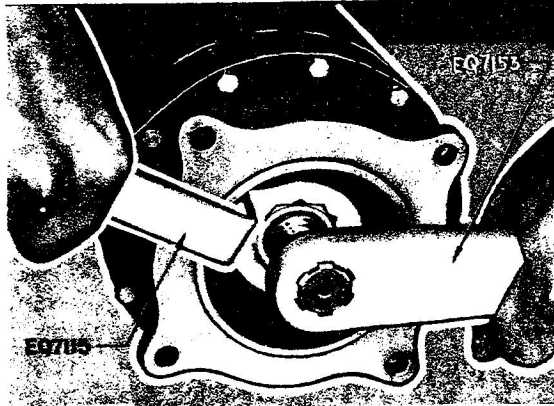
Removal of Nut From Drive End of Armature Shaft
